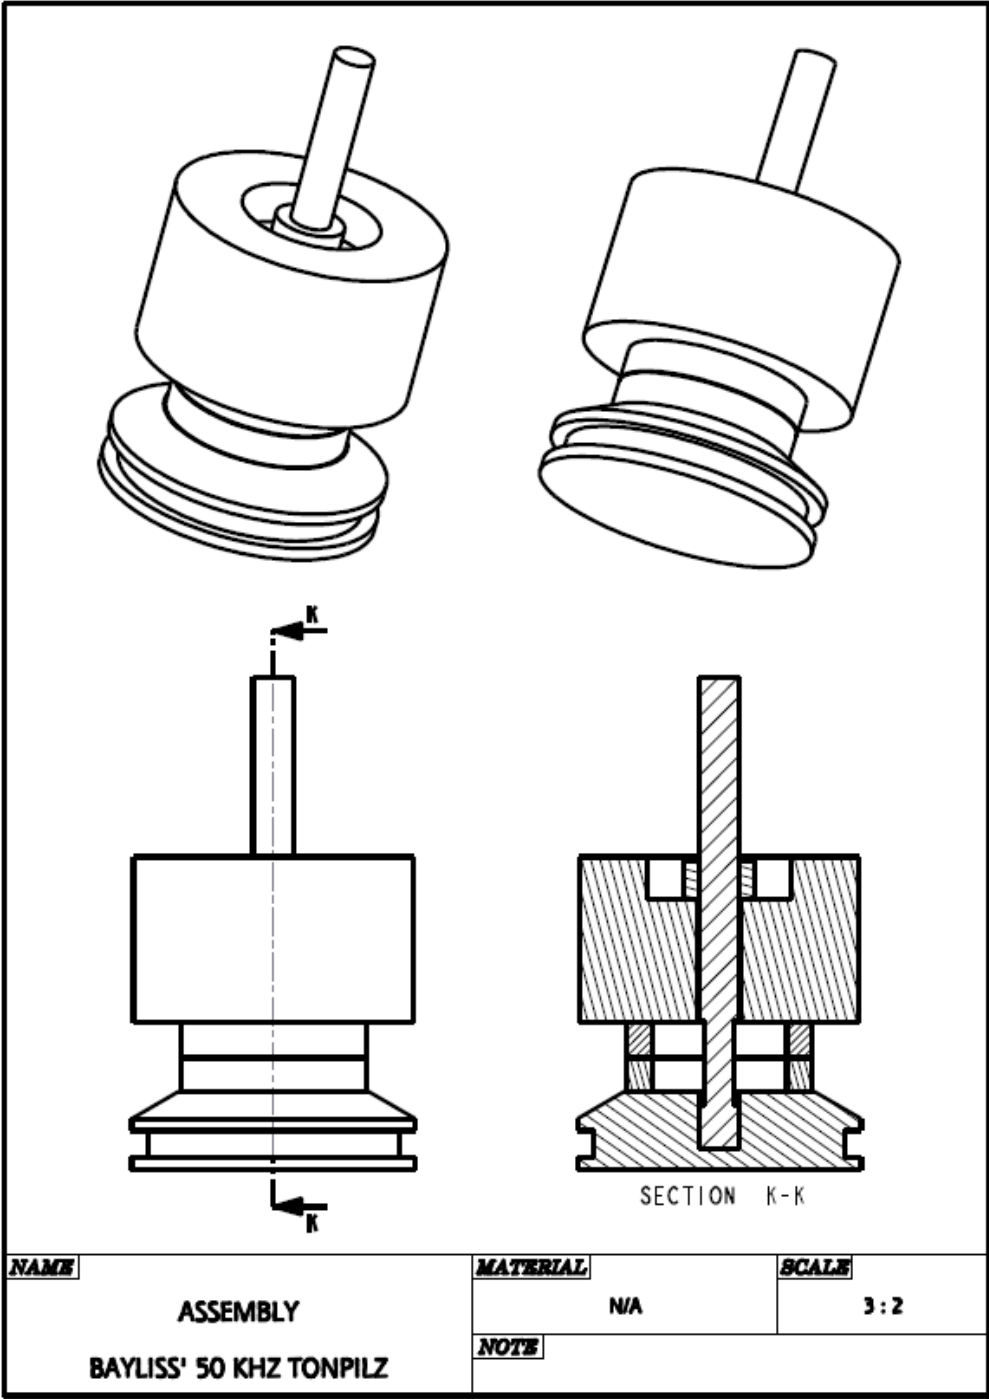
Technical drawing of Bayliss' 50 kHz Tonpilz's assembly (Adapted from [75])
